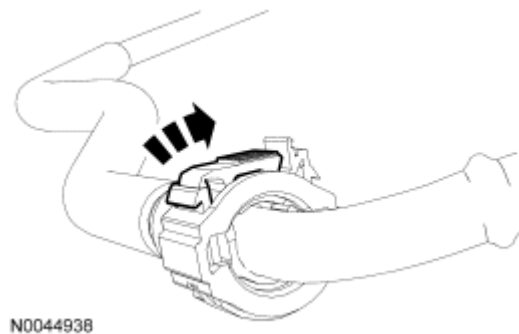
Rotating Primary Locking Tab On Retainer Clip To Closed Position
